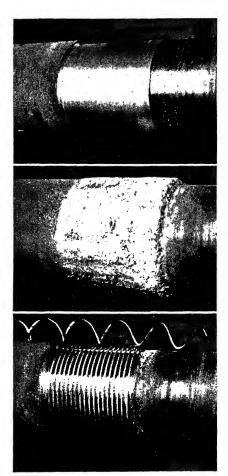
Bronze-welding renews threads on paper mill pulp grinder shaft. The old threads were first machined off (top) to permit rebuilding the area with bronze (center); the finished job (bottom) and the chip indicate the soundness of the weld metal.
